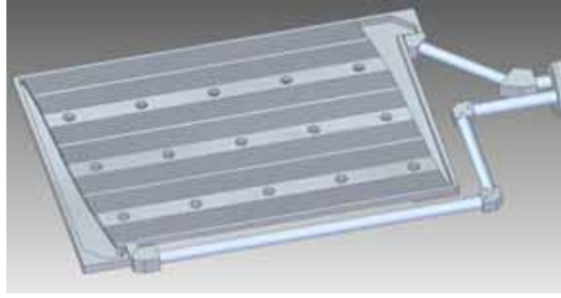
CAD rendering showing plate internal details. The pipe at 45 was required to provide welding access to a manifold joint[37].
